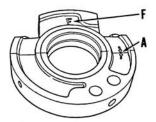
Intermediate main bearing housings should be assembled so arrows (A) are pointing towards each other. Install housing in cylinder block with (F) mark facing front of engine.
